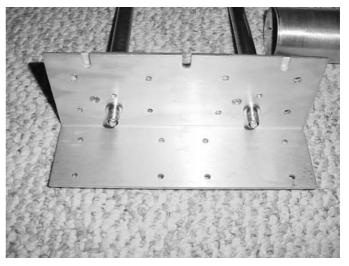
Photo B — A pair of end plate and copper pipe assemblies are attached to one piece of the aluminum angle bracket.
